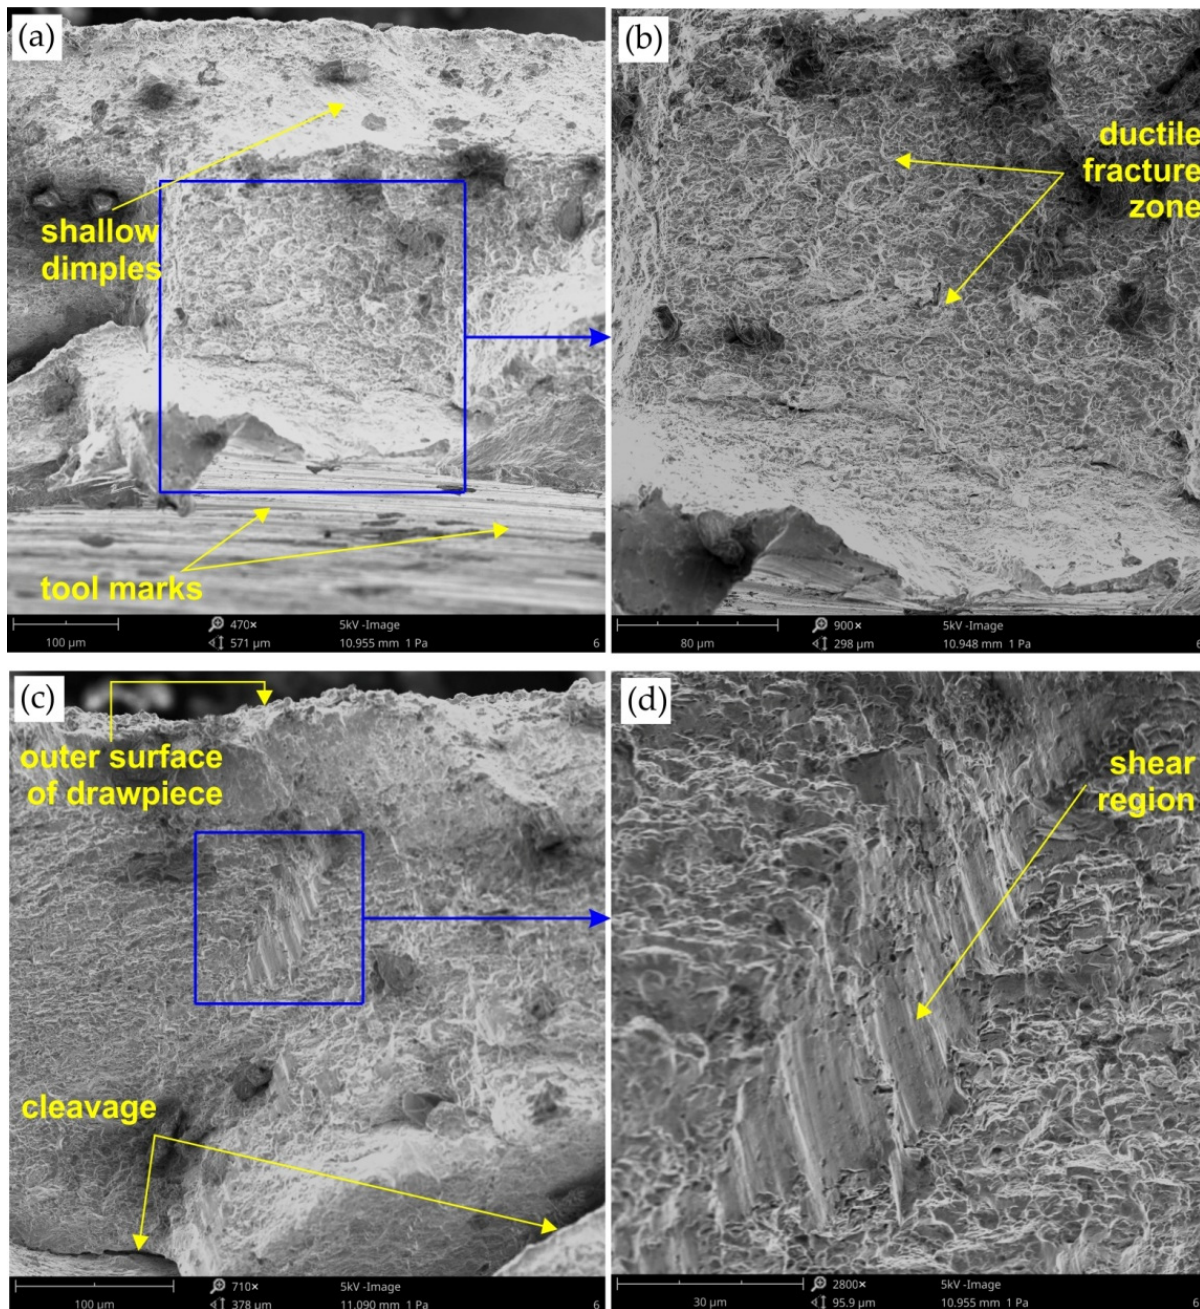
SEM micrographs of the fracture surface of VWACF (maximum formable wall angle $\alpha = 45^\circ$): (a) cross-section of the fractured surface, (b) view of the near-edge inner surface of the drawpiece, (c,d) magnification of the ductile fracture area.
